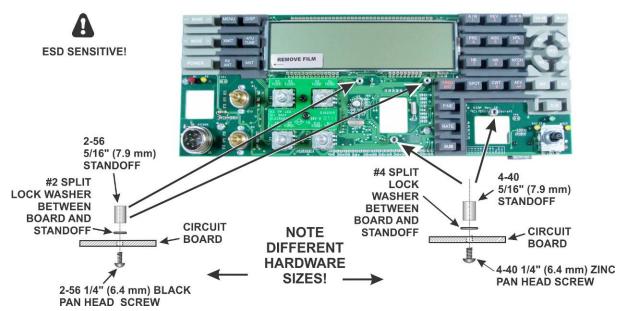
Preparing the Front Panel Board for Mounting, Part 2.
